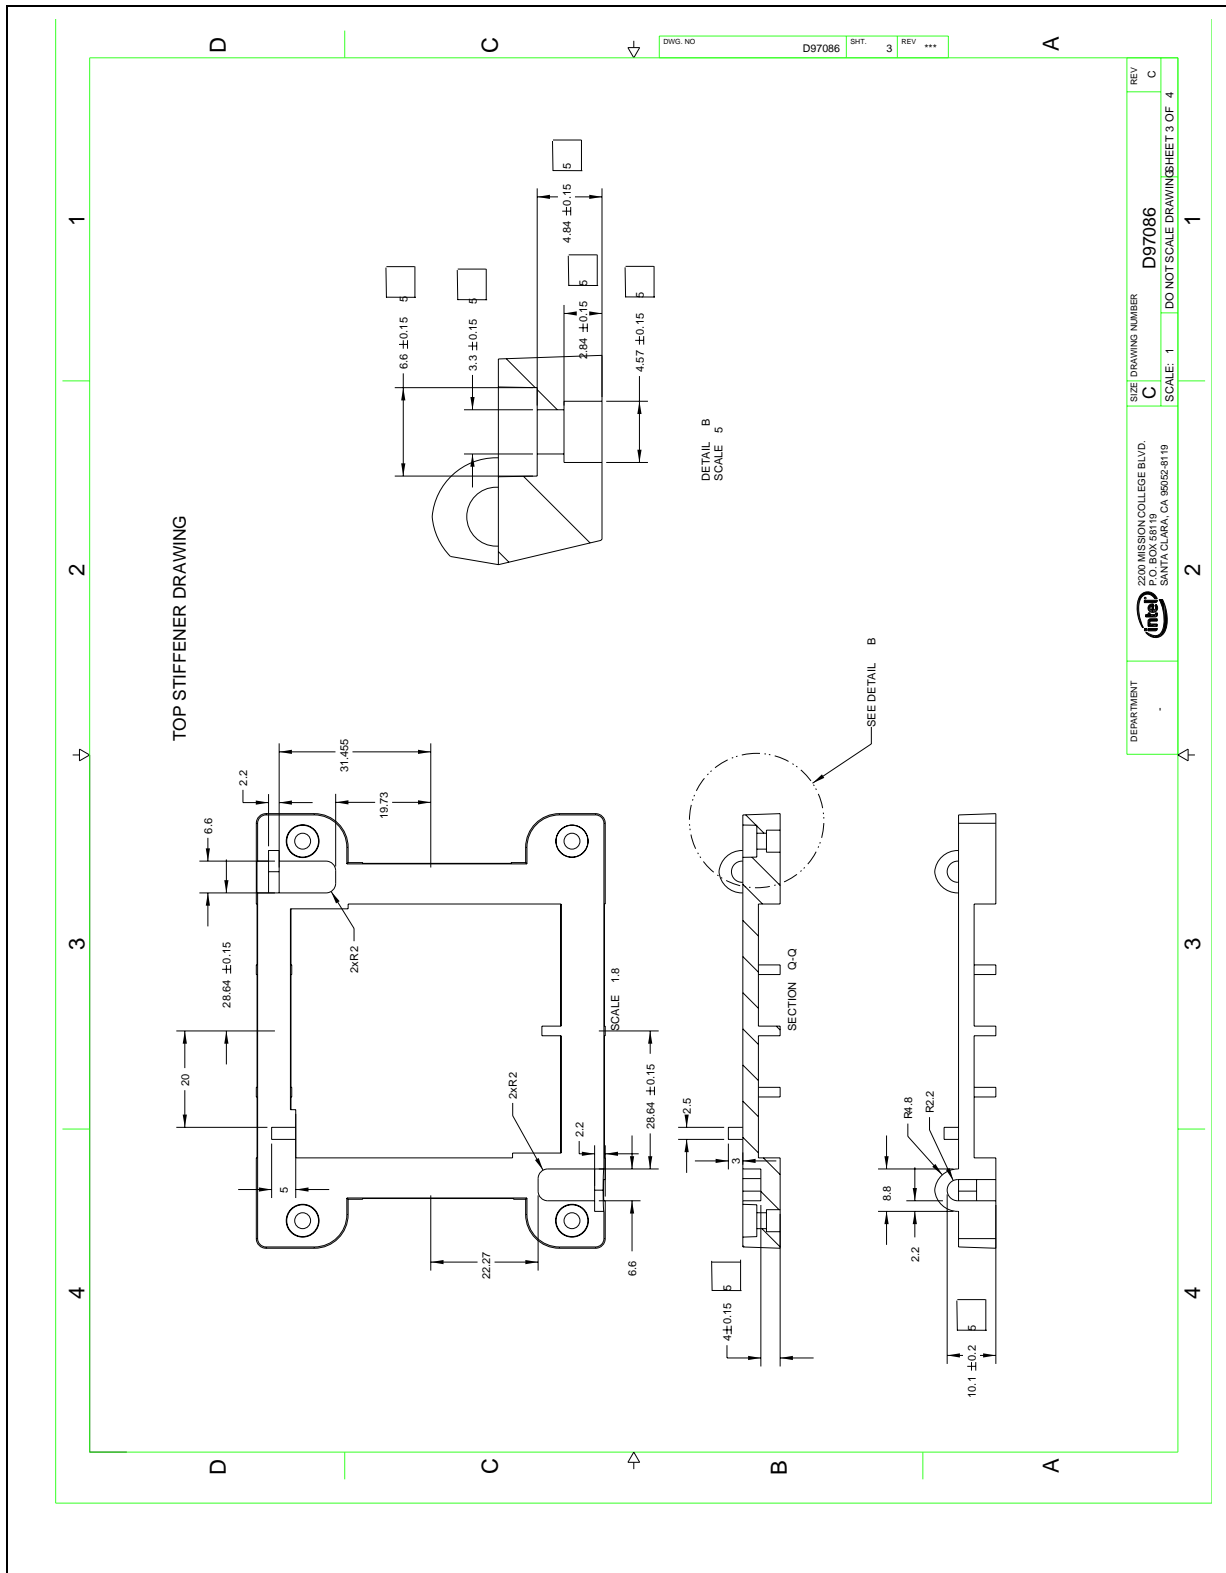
CNB Heatsink Stiffener Drawing (4 of 4)
